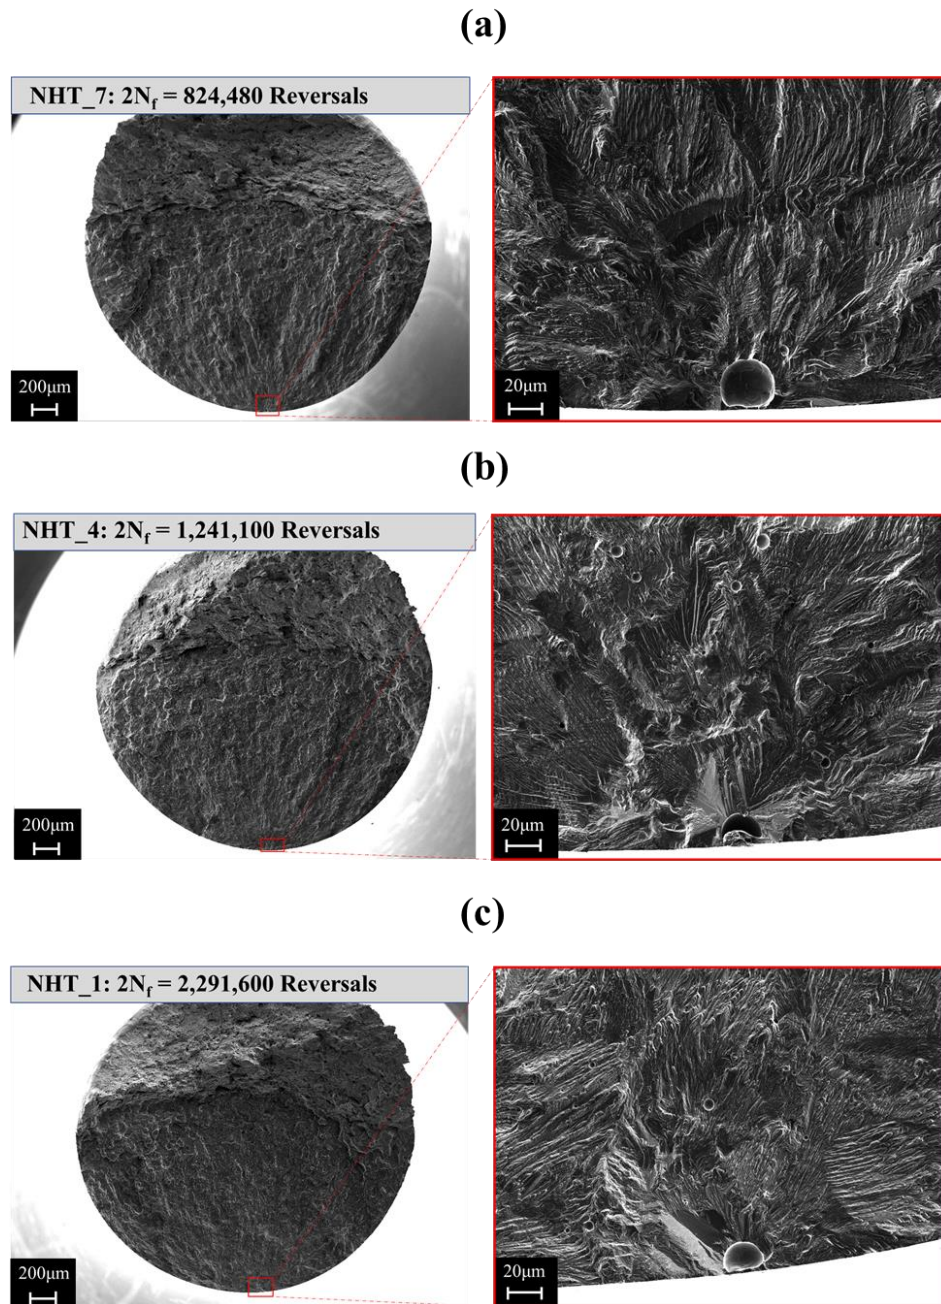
Fracture surfaces of L-PBF 17-4 PH SS ultrasonic NHT specimens with uniform gage tested at: (a) 500 MPa with 824,480 reversals to failure, (b) 475 MPa with 1,241,100 reversals to failure, (c) 450 MPa with 2,291,600 reversals to failure.
